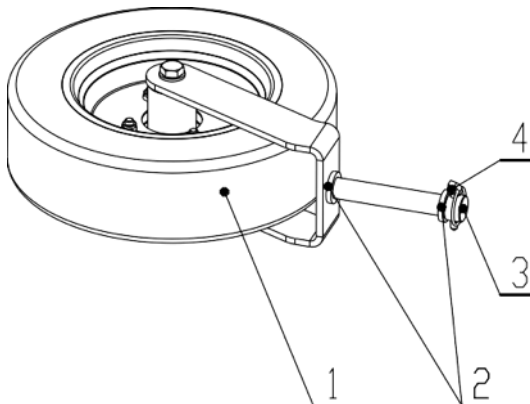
R & L Skid Weldment and Fittings
